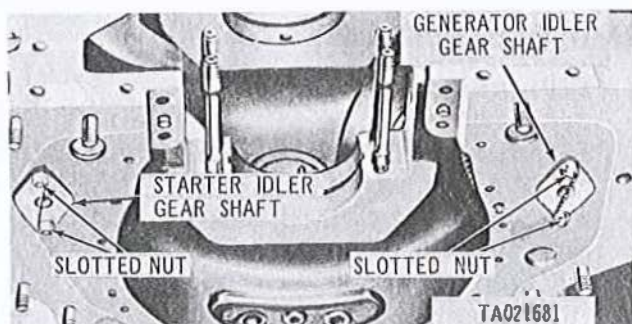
Removing or installing starter and generator idler gearshaft flange nuts.
